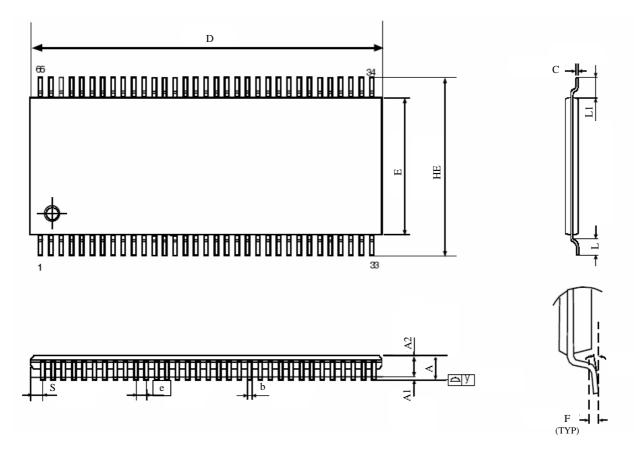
66 Pin TSOP II Package Outline Drawing Information Units: mm
